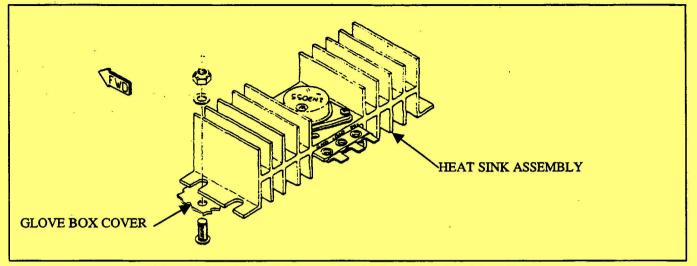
Heat Sink Assembly (Voltage Regulator) Installation
